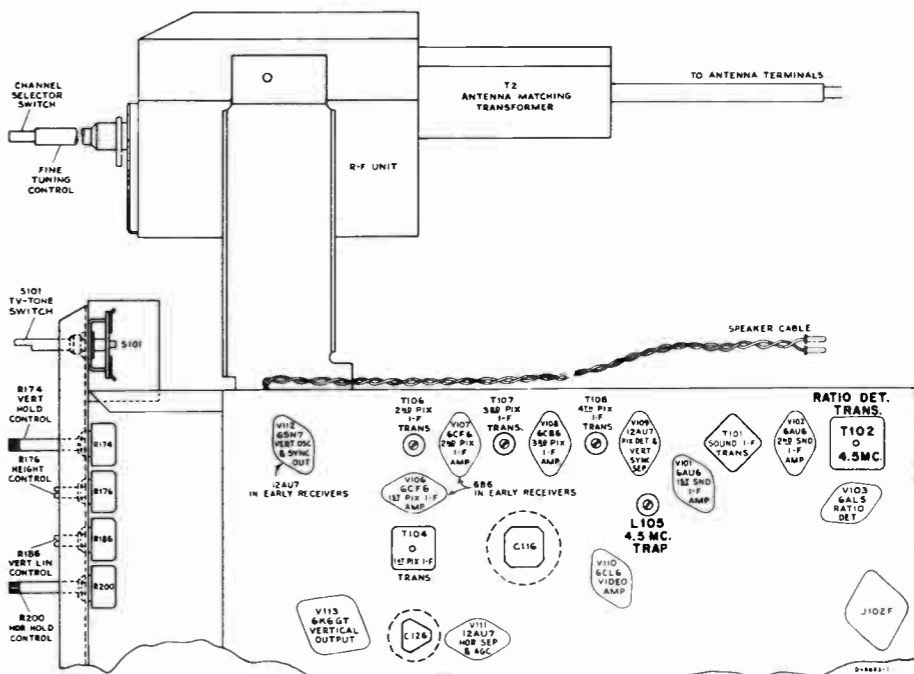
Bottom Chassis Adjustments (KRK11B Tuner Shown)
